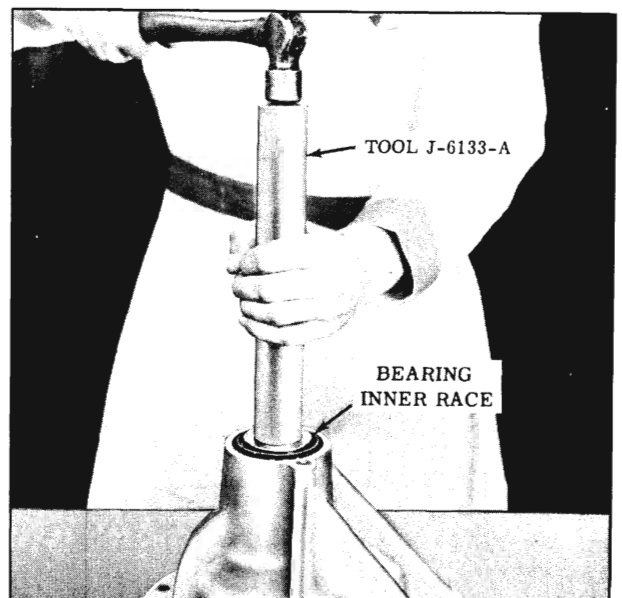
Installing Front Pinion Bearing Inner Race
